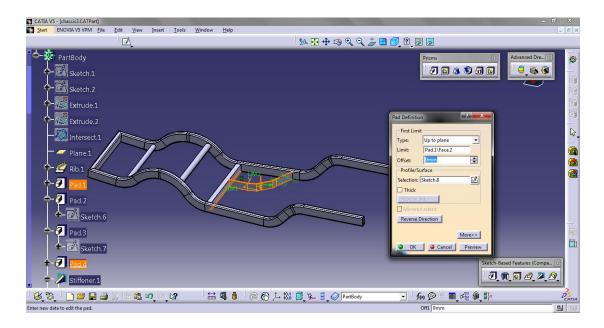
Used Pad And Pocket Tool For The Side Rails In Chassis
